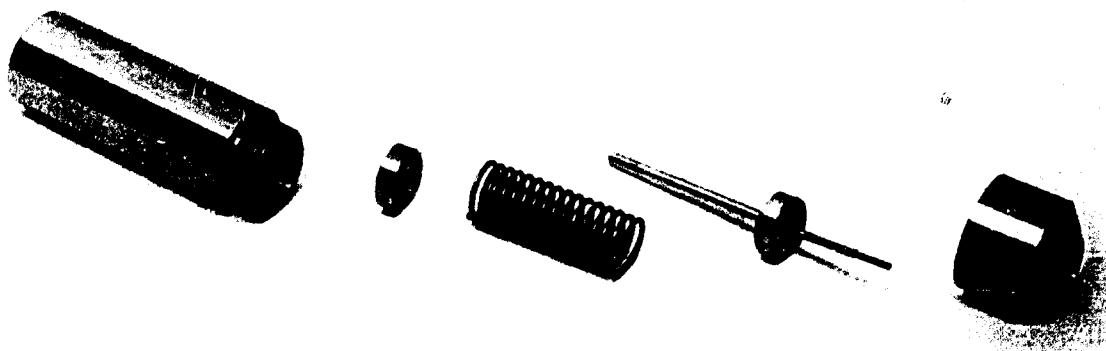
Micro-Module Unsoldering and Ejector Head (Exploded View)
